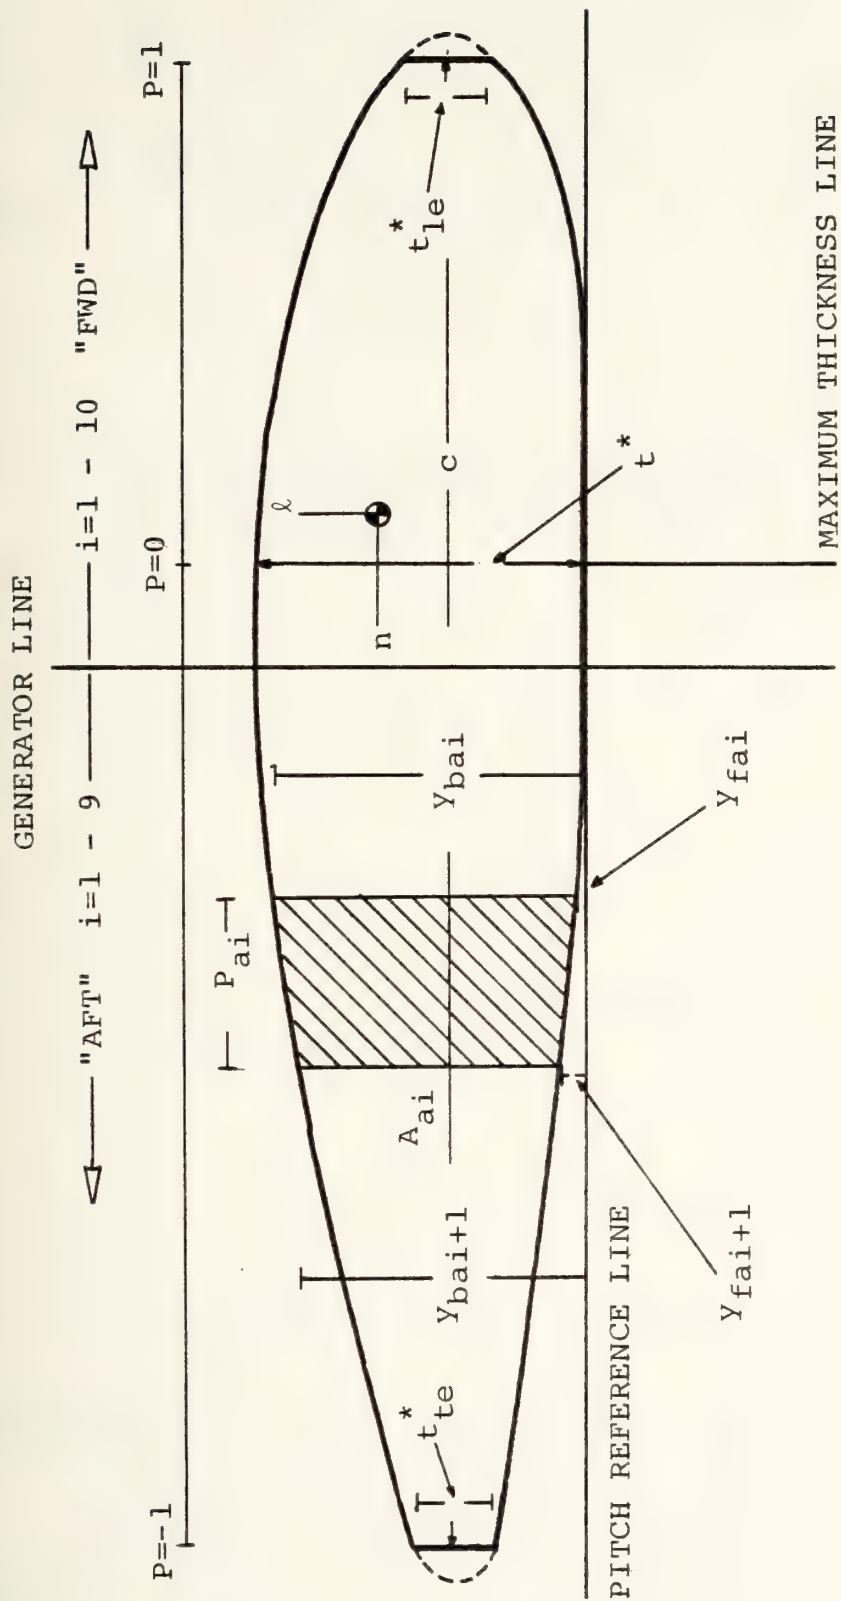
Expanded Cylindrical Blade Section--Profile View
